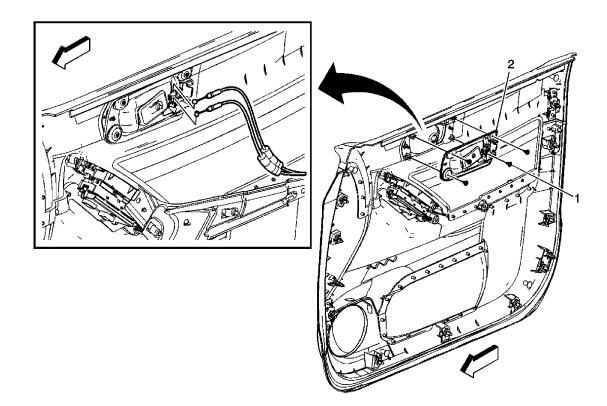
View Of Front Side Door Inside Handle Courtesy of GENERAL MOTORS CORP.
